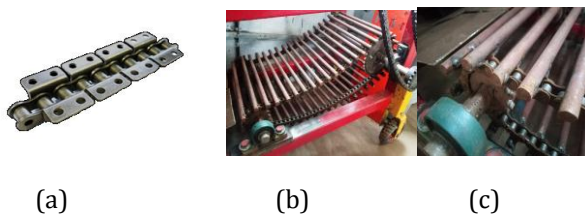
Conveyor unit (a) K2 chain attachment (b) Side view (c) 12 mm diameter mild steel rod welded in K2 attachment
